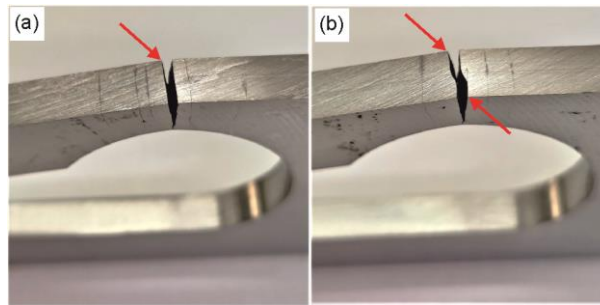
(a) One crack leading to final fracture, and (b) two joined cracks leading to a final fracture marked with red arrows.
